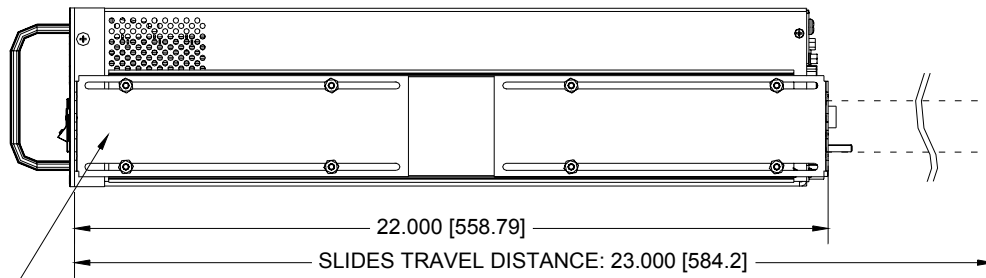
BOP 1KW OUTLINE DIMENSIONS (SHEET 1 OF 2)
